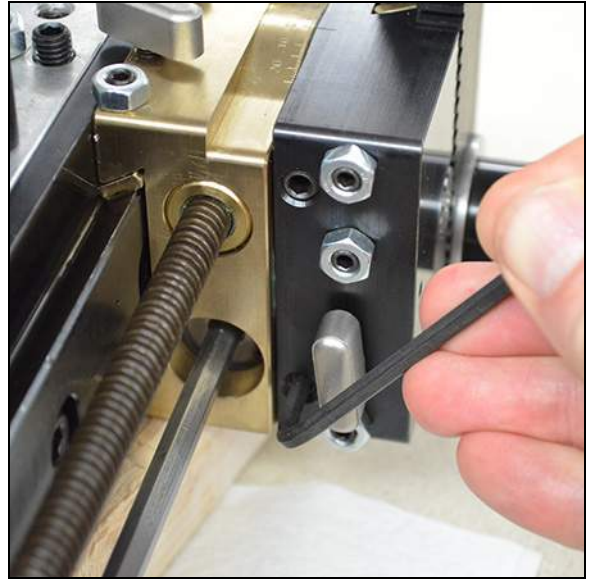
LOOSEN THE SWIVEL LOCK SETSCREWS
